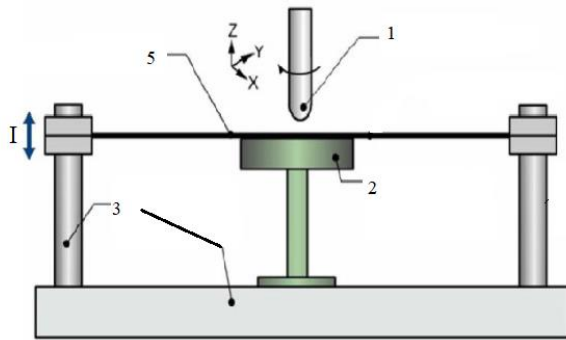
Incremental two-point forming with spherical tip tool and partial die, [13]: 1 – main tool; 2 – non-specific support; 3 – fixture; 4 – semi-finished product; I – tool penetration movement in the direction of the Z axis
